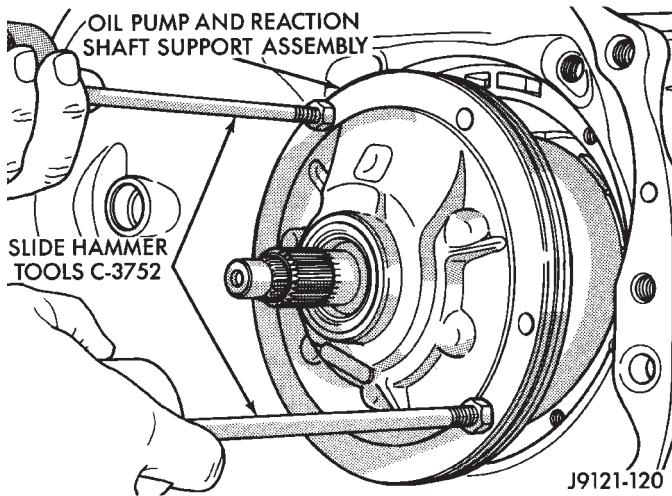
Removing Oil Pump And Reaction Shaft Support Assembly
